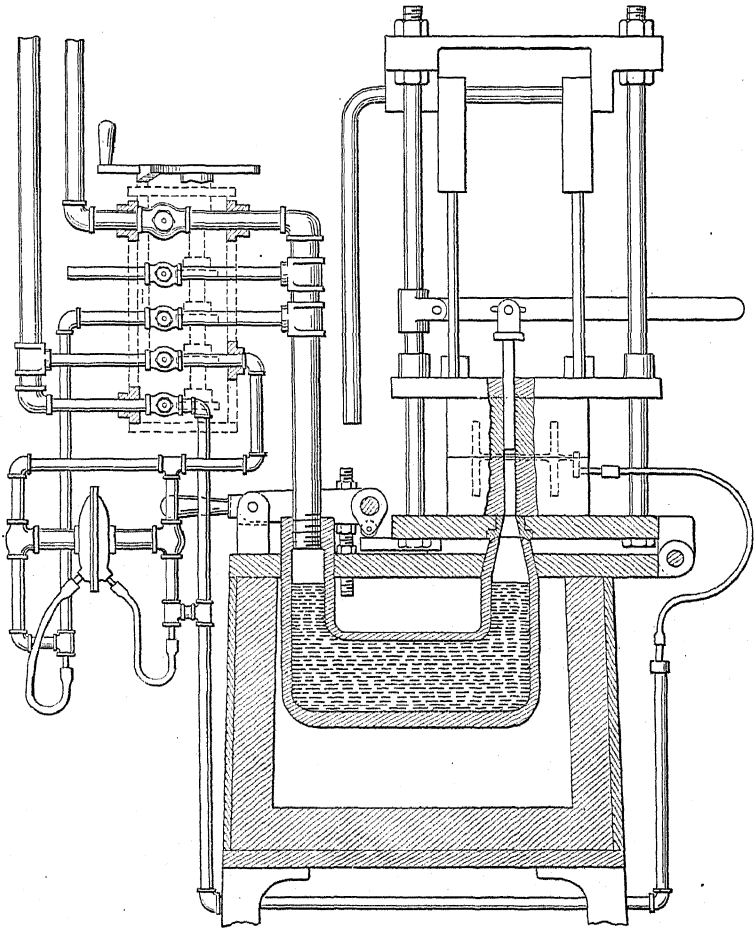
ANOTHER TYPE OF COMPRESSED-AIR MACHINE.
